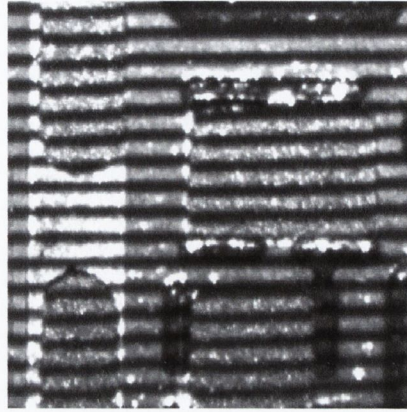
Solder paste deposits with horizontal fringes superimposed on them
